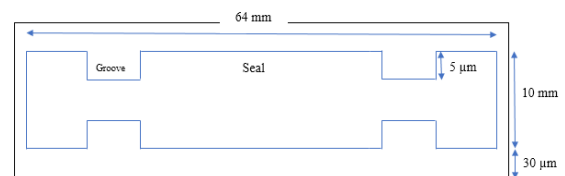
Schematic cross-sectional diagram for bearing with seal design
